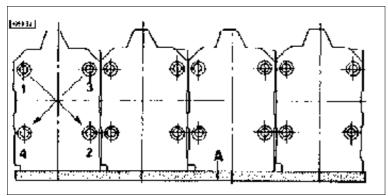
Using alignment plate A to install the cylinder heads and cap screw tightening order.
